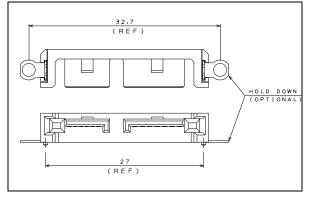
7.0 mm Slimline device plug connector interface dimensions optional hold down mounting
